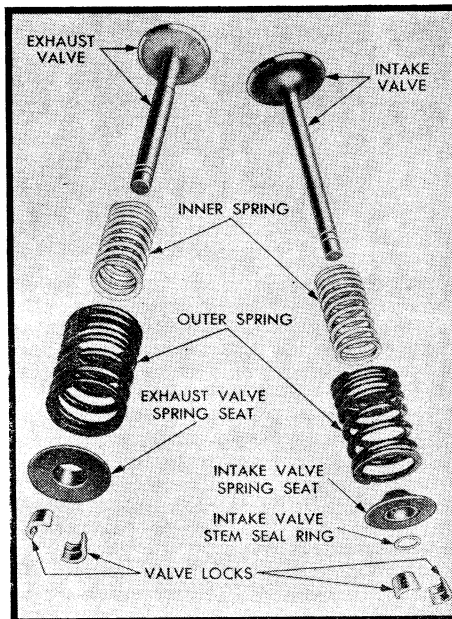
Layout of valves and related parts. Typical of all double rocker arm V8 engines
